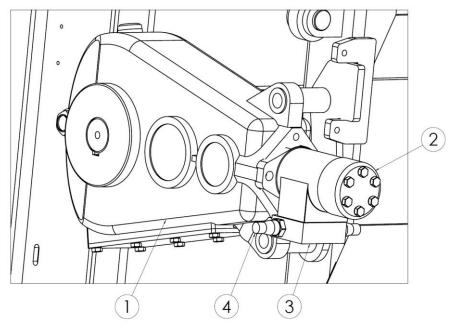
Hydraulic drive system of the floor conveyor 1 – gearbox, 2 – hydraulic motor, 3 – block valve, 4 – valve seal
